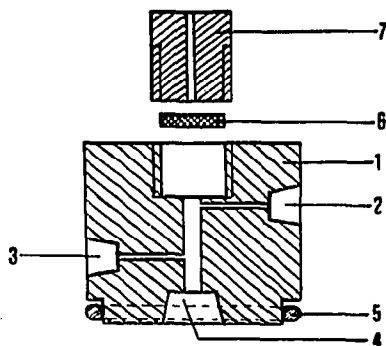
Injection block. 1 = Piece of Perspex; 2 = connection to the reservoir of terminating electrolyte; 3 = hole for rinsing the capillary; 4 = position for connection of capillary tube; 5 = O-ring fitting; 6 = septum; 7 = bolt for fitting of septum.
